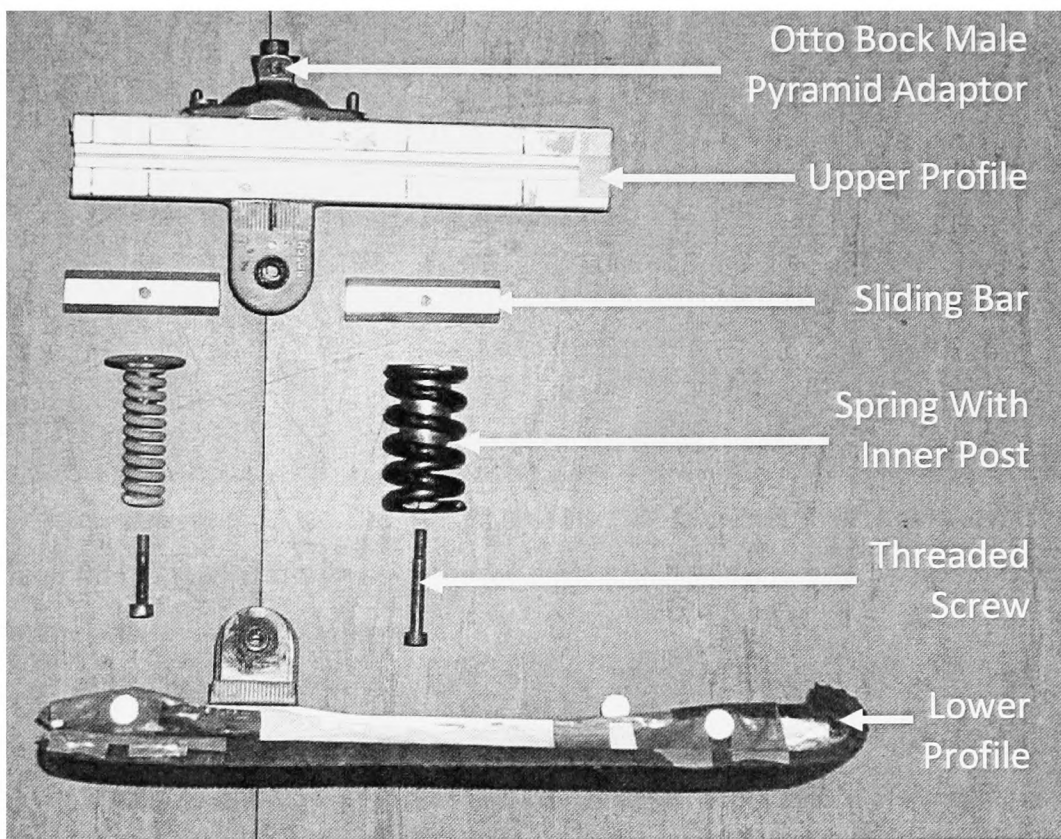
Exploded assembly view of individual components of the CFAM.
